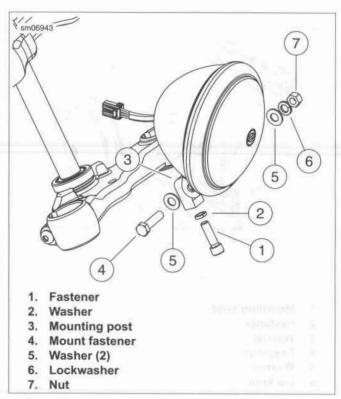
Headlamp Assembly Mount: XL 1200X
